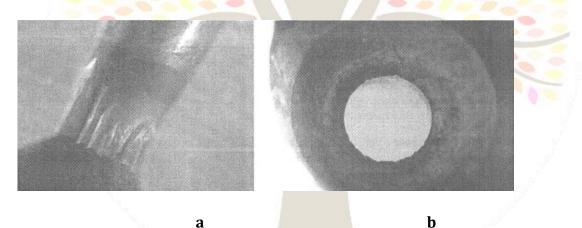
Scratching. A) – the internal shape of the die; b) – view of the surface from the exit side
